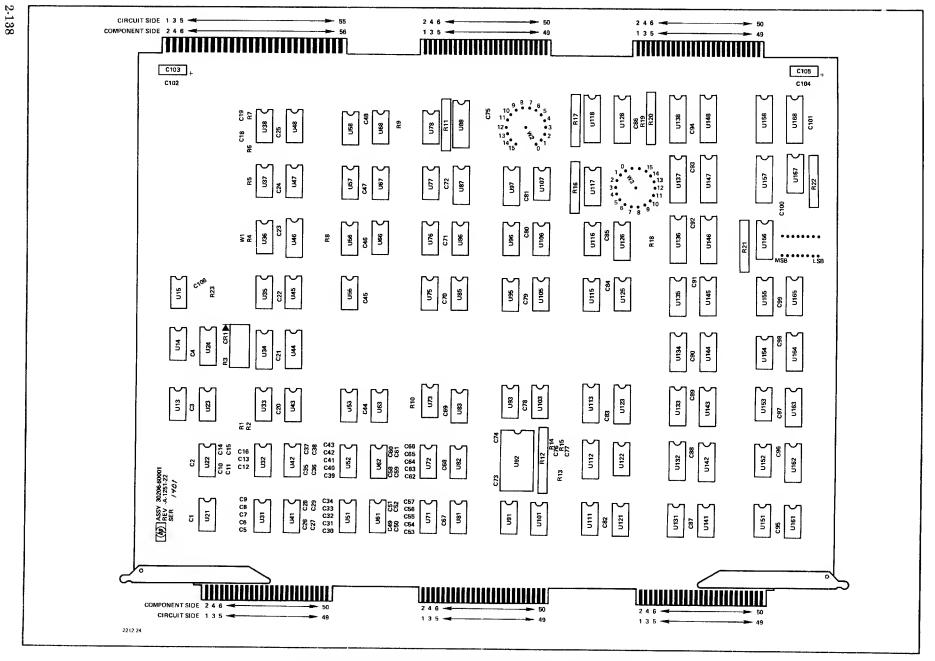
Card Reader Interface PCA, Parts Location Diagram
